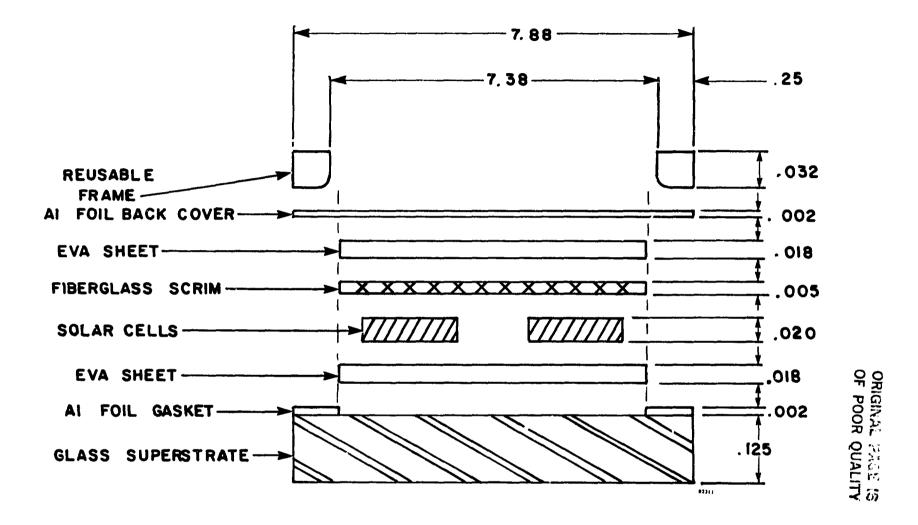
EXPLODED VIEW OF MODULE LAYUP WITH FRAME. Vertical dimensions exaggerated. Drawing not to scale. Dimensions in inches.
